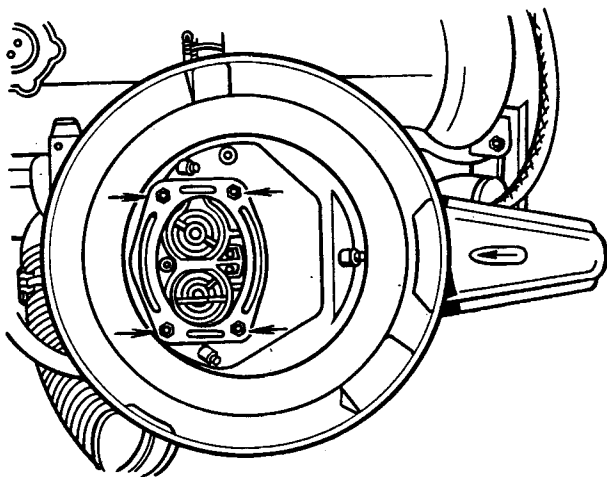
Removing Air Cleaner. Arrows Show Cleaner-to-Carburettor Fastening Nuts
